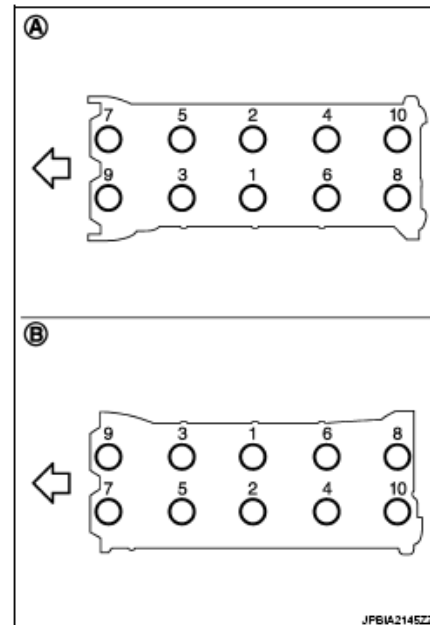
Identifying Cylinder Head Mounting Bolts Loosening Sequence
